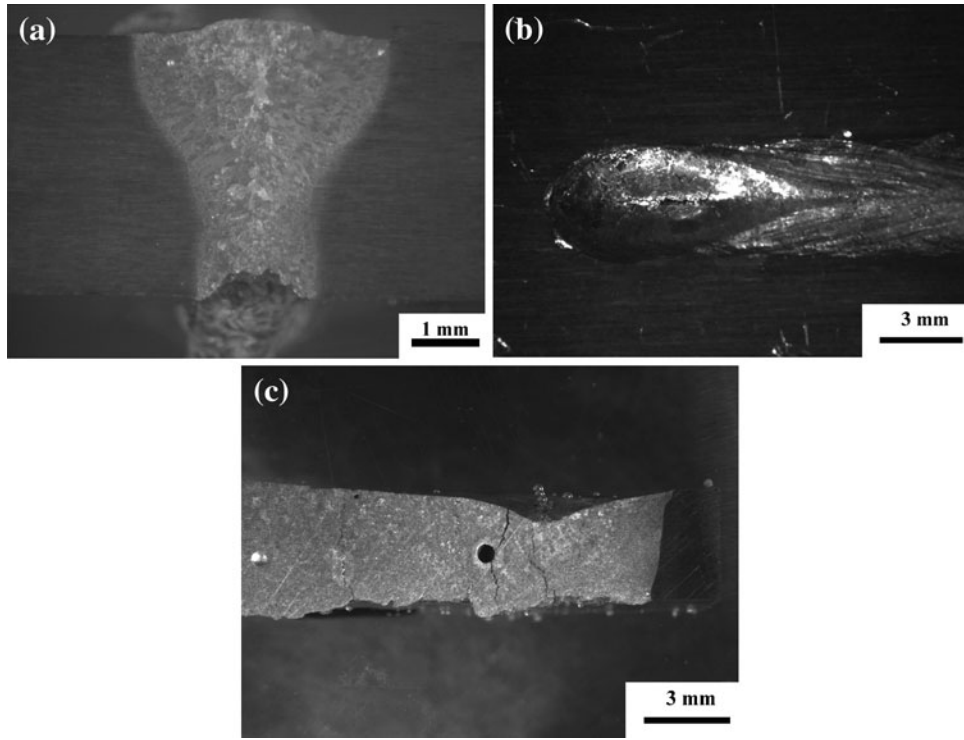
Laser beam weld of Al2198-T8 for energy deposition of 103 J/mm and beam focal point at top surface of workpiece. (a) Transverse cross section. (b) Top surface of workpiece. (c) Longitudinal cross section at symmetry plane. Beam power and welding speed are 3441 W and 2 m/min, respectively
